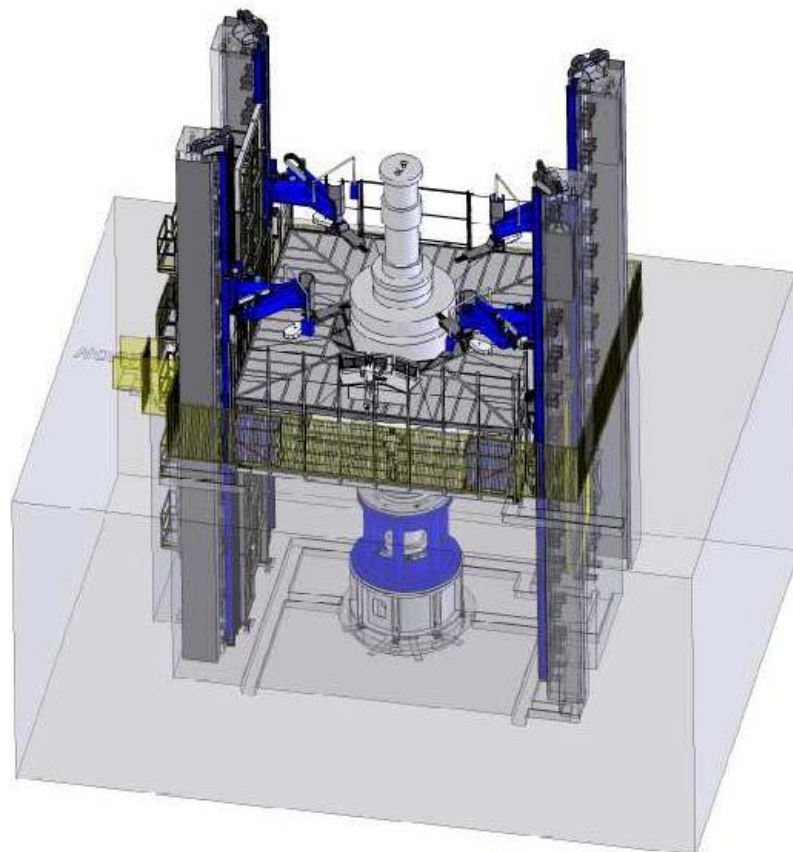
Example of a vertical welding stand [Polysoude 2010, p.56]
